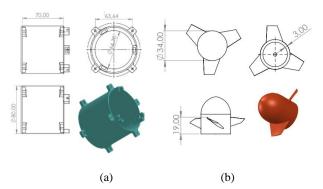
a) Thruster duct design technical drawings, b) Propeller design technical drawings
